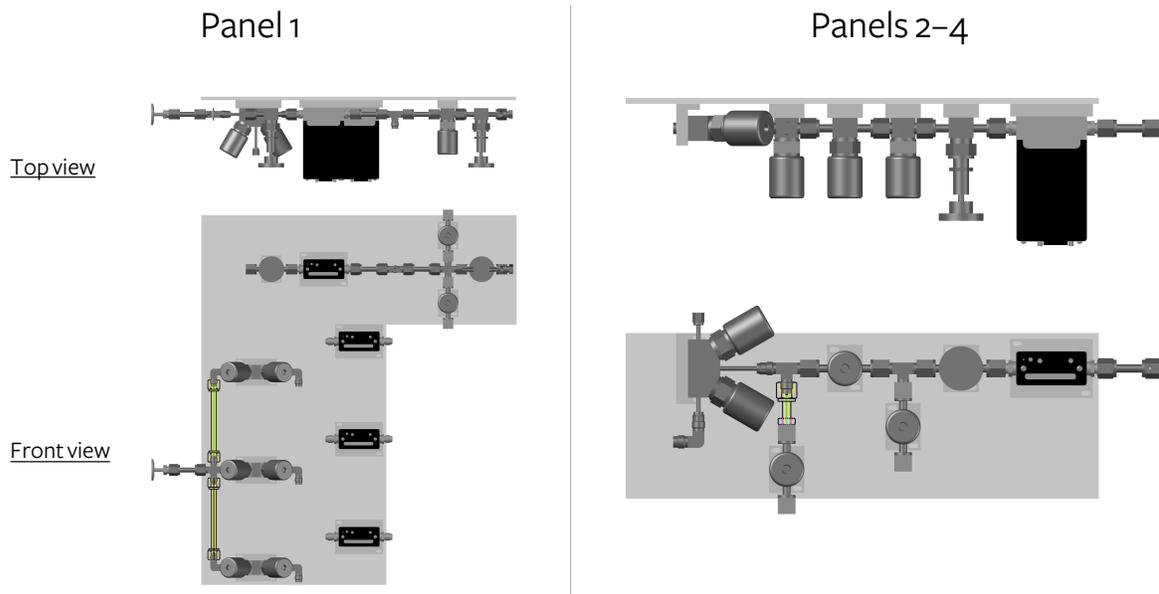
AutoCAD model of panel designs with equipment fully assembled
